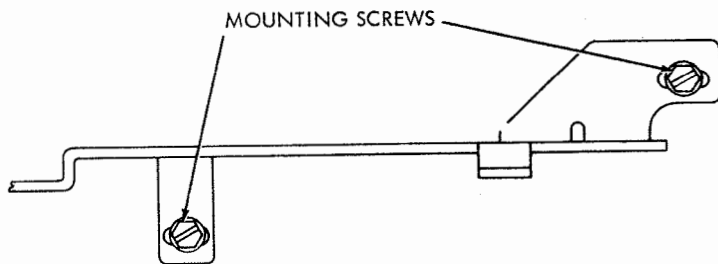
N. KEYBOARD TT-371/UG, CHARACTER COUNTER MECHANISM
